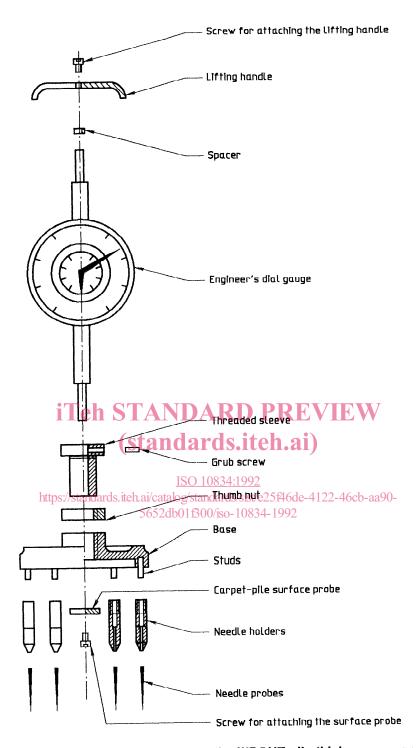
Exploded diagram of the WRONZ pile-thickness gauge
